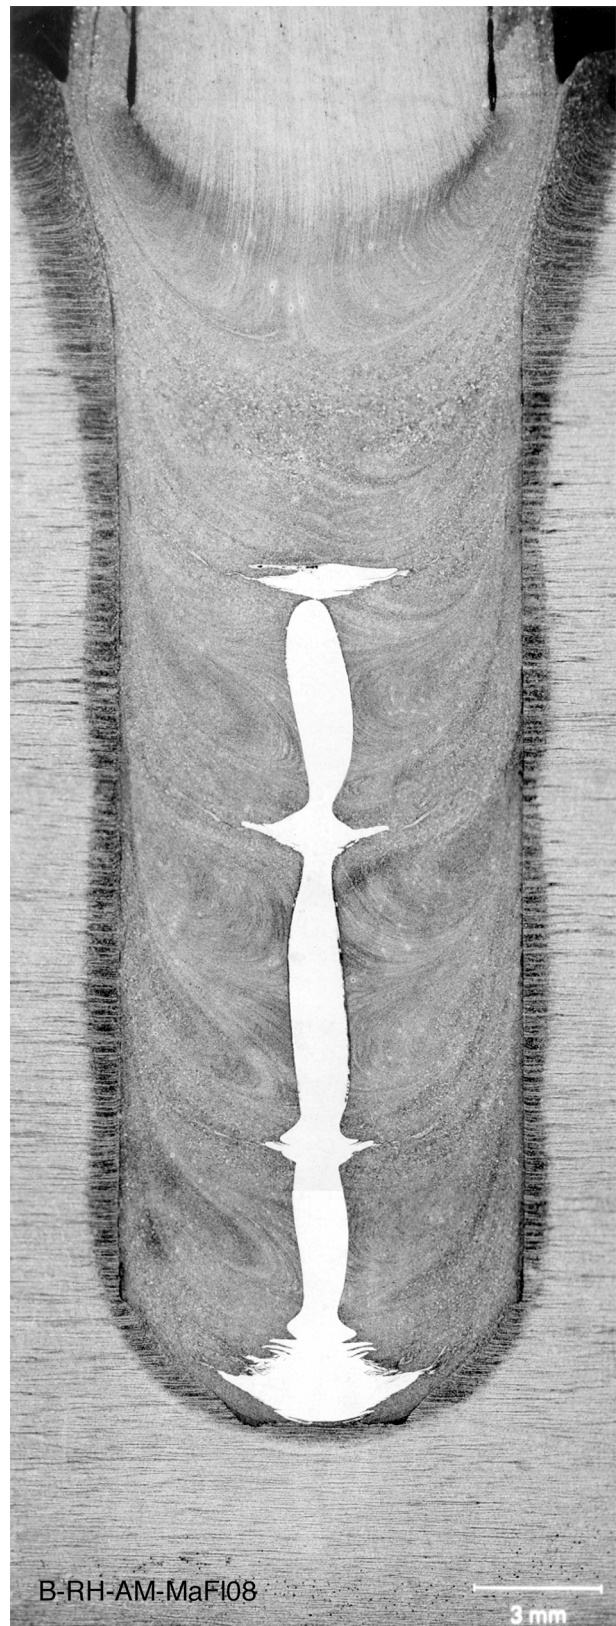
Macrograph of specimen FI08, welded with nickel tracer rod in API 5L X65 base material.
